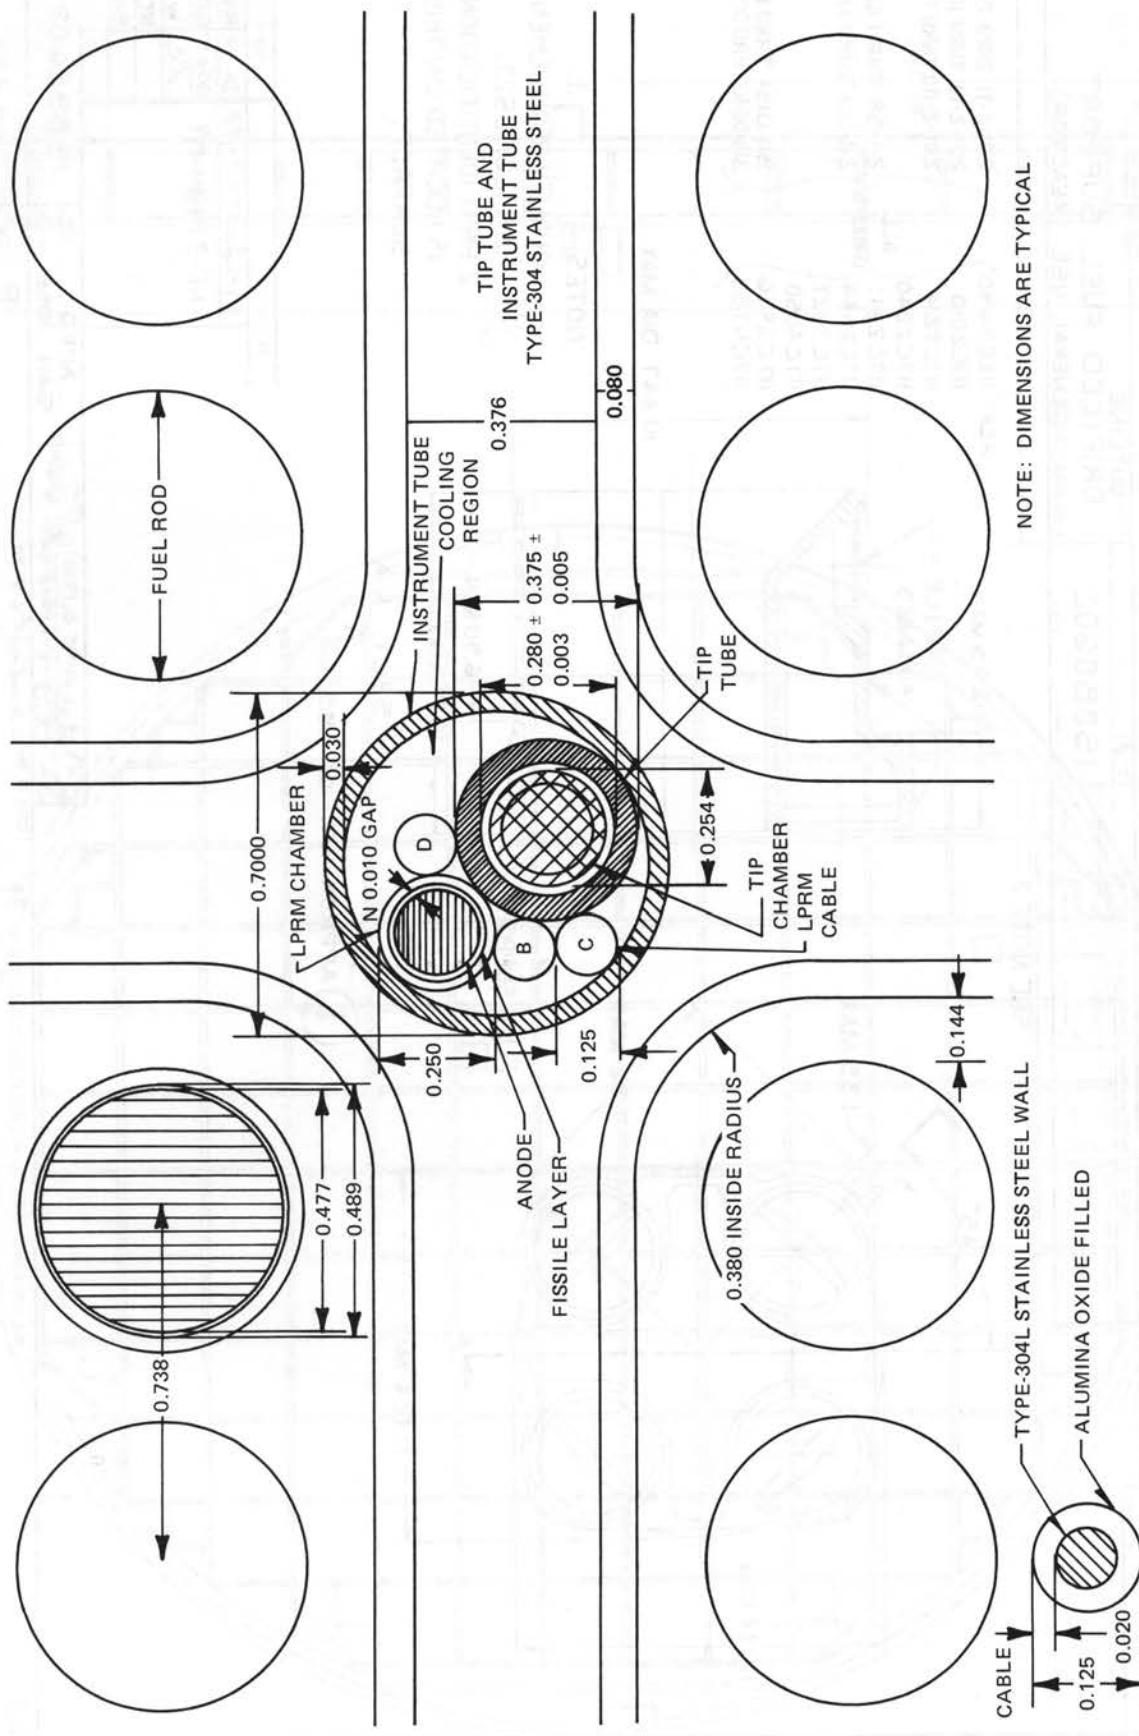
TIP/LPRM In-Core Assembly Cross Section
